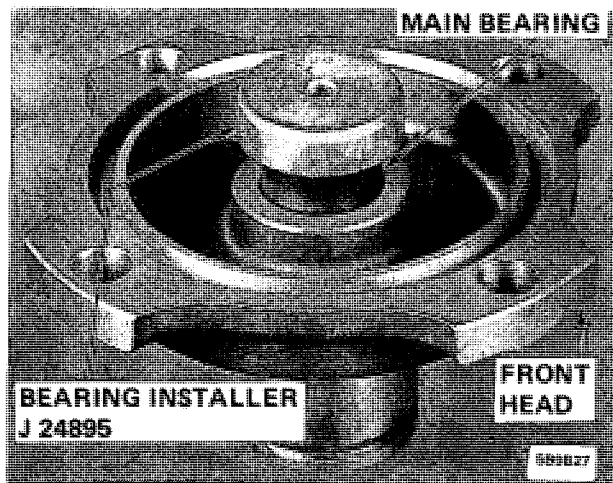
B-52 - Installing Main Bearing - 4 Cylinder Compressor
